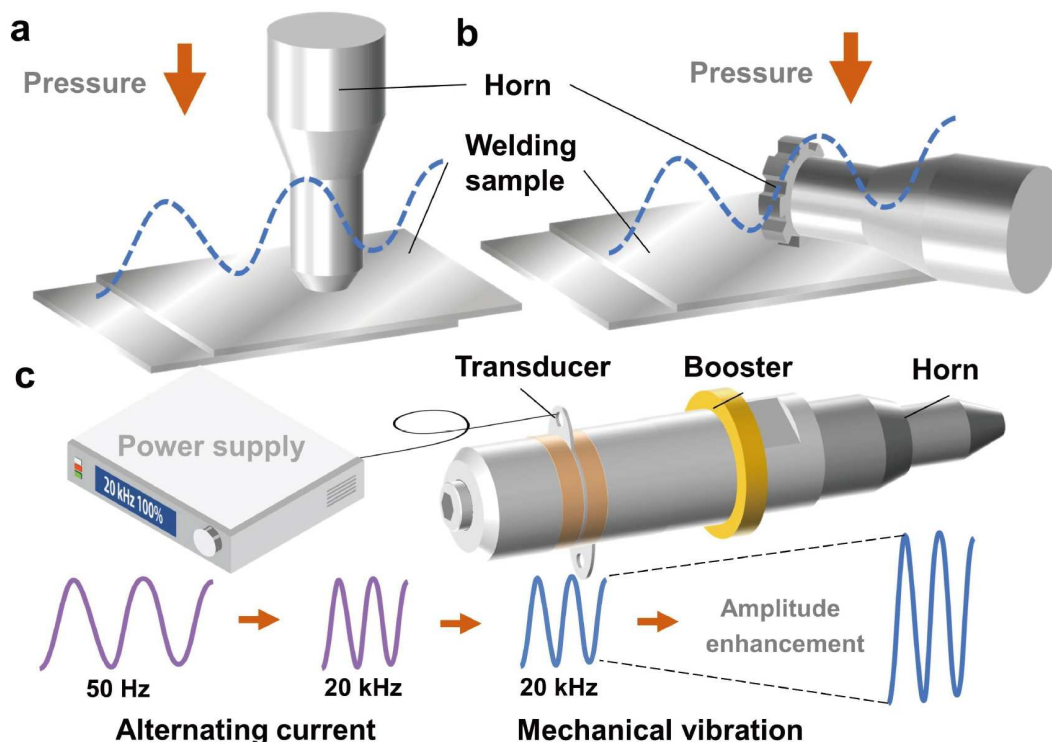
Schematic diagram of (a) ultrasonic plastic welding (UPW) and (b) ultrasonic metal welding (UMW). (c) The fundamental principle of UW.
